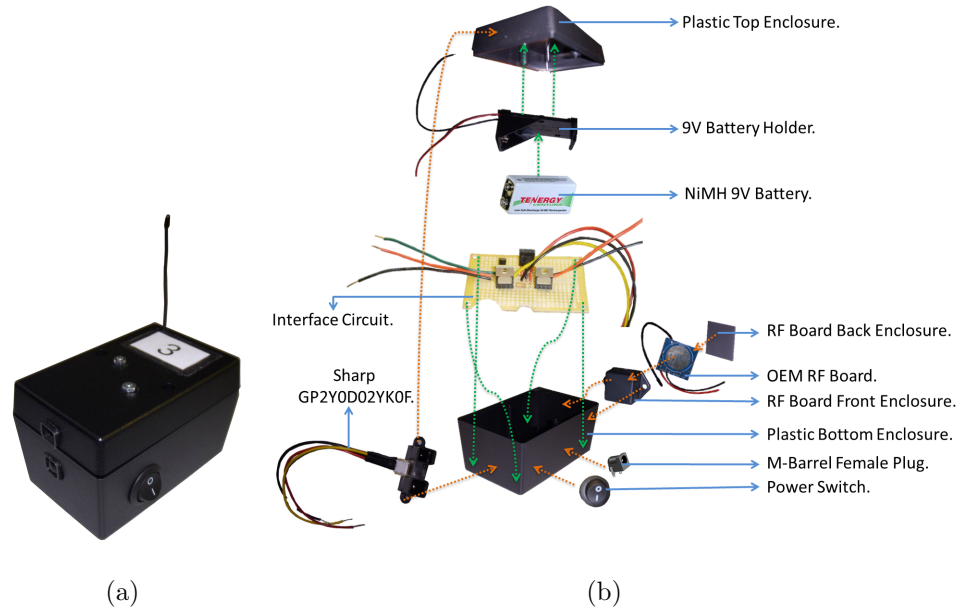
Wireless sensing node. (a) Assembled view of one node and (b) Exploded view of one sensing node showing its internal components.
